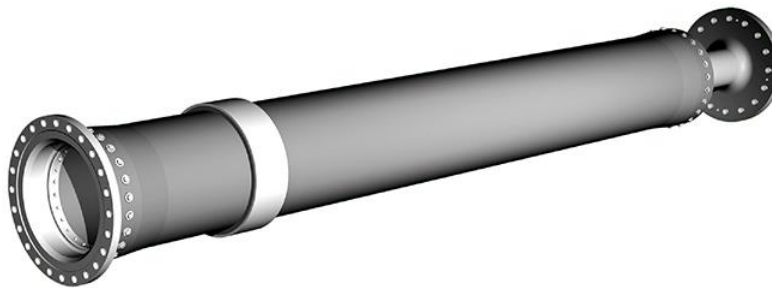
Composite shaft. The flange and its metal, connection part is shown at the left end. The metal ring is also visible. At the right end the spool is shown.
